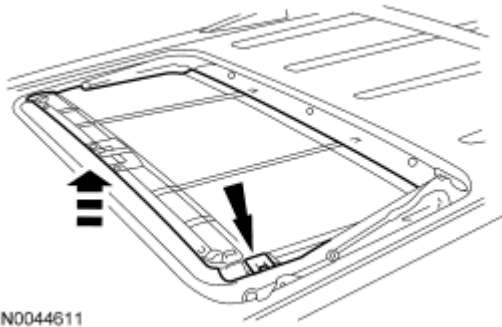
Disengaging Roof Opening Panel Shield Guide Feet
